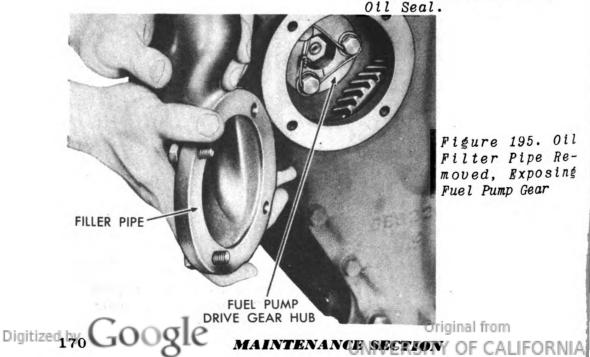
Oil Filter Pipe Removed, Exposing Fuel Pump Gear
